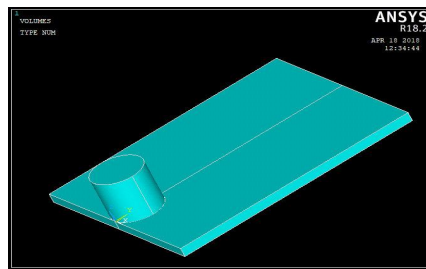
Geometry of Friction Stir welded components in ANSYS
